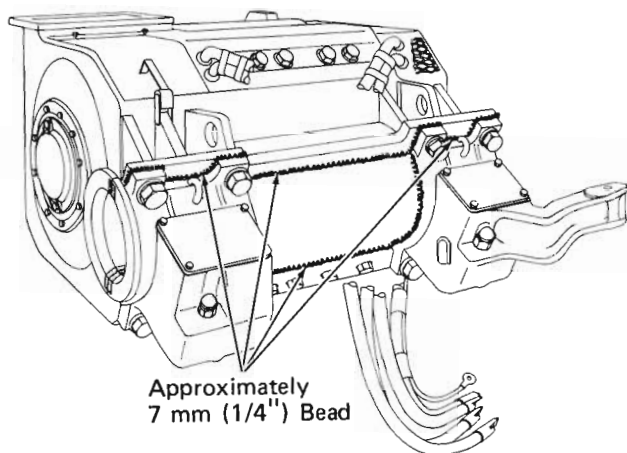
Support Bearing And Axle Shield Moisture Seal
